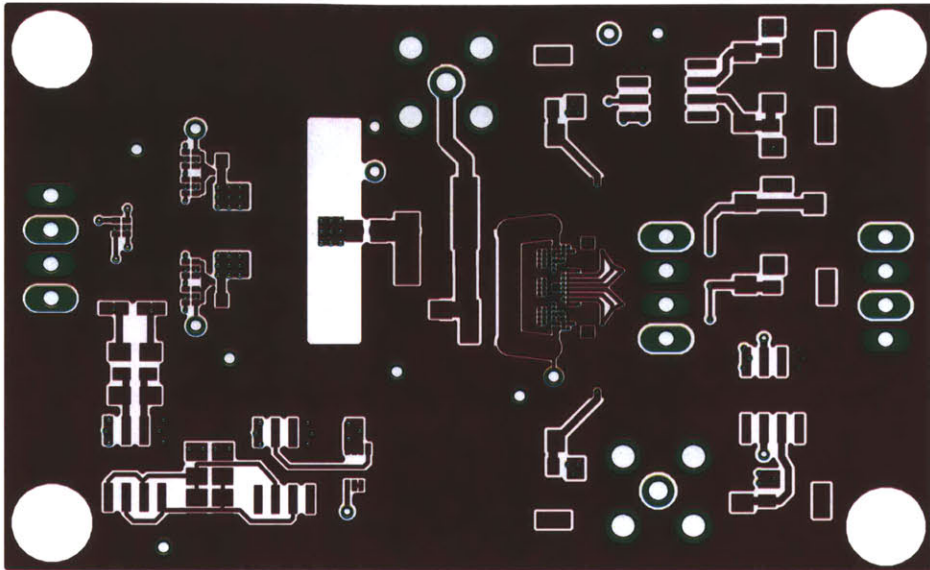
The Layer 1 PCB Layout of the Non-isolated GaN-Si Dc-dc Converter Prototype.
